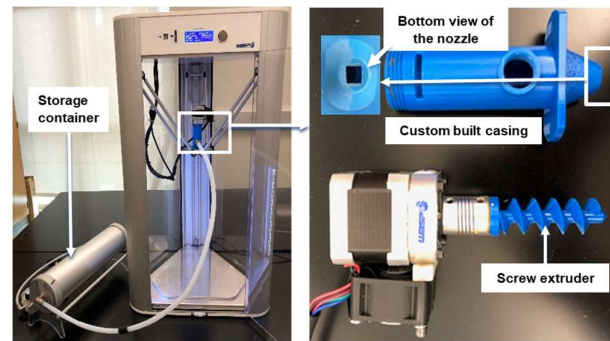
Delta WASP 2040 3D Printer and its nozzle assembly.
